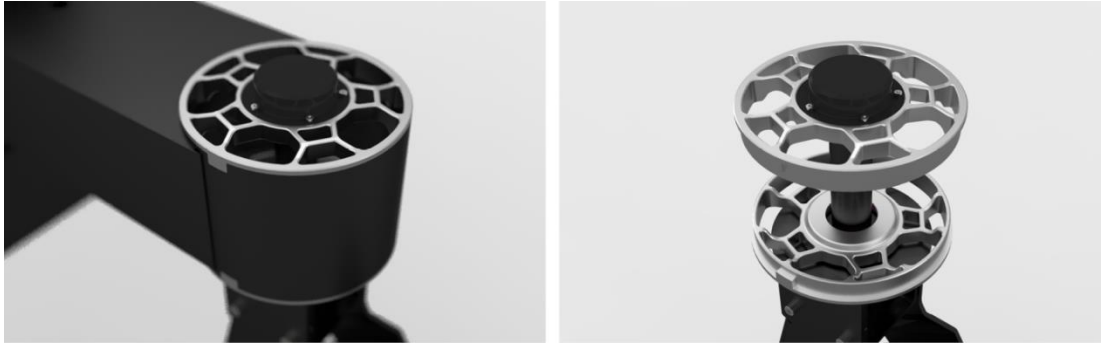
The final machined swivel bearing housing shown seated to the chassis and illustrated with the chassis removed.
